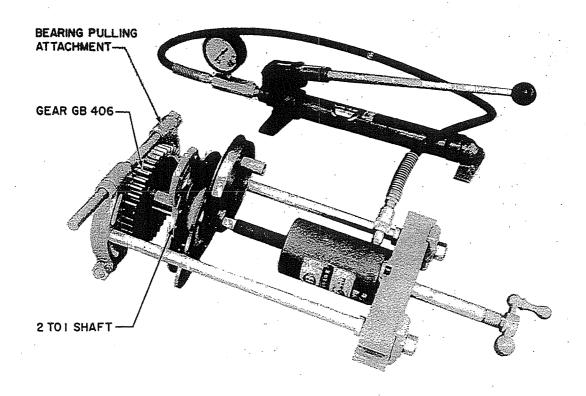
2 to 1 Shaft, Installation of Gear GB406
